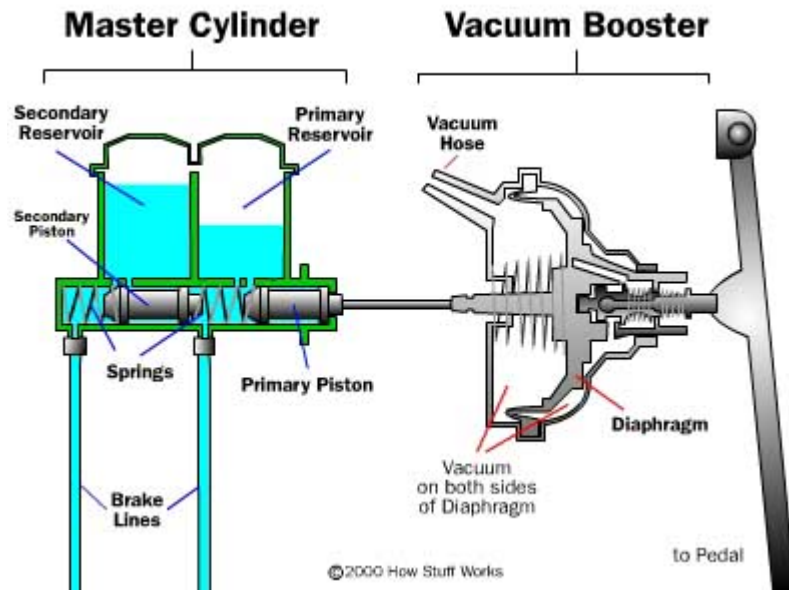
Primary Piston on Master Cylinder Mechanical Connection [24]
